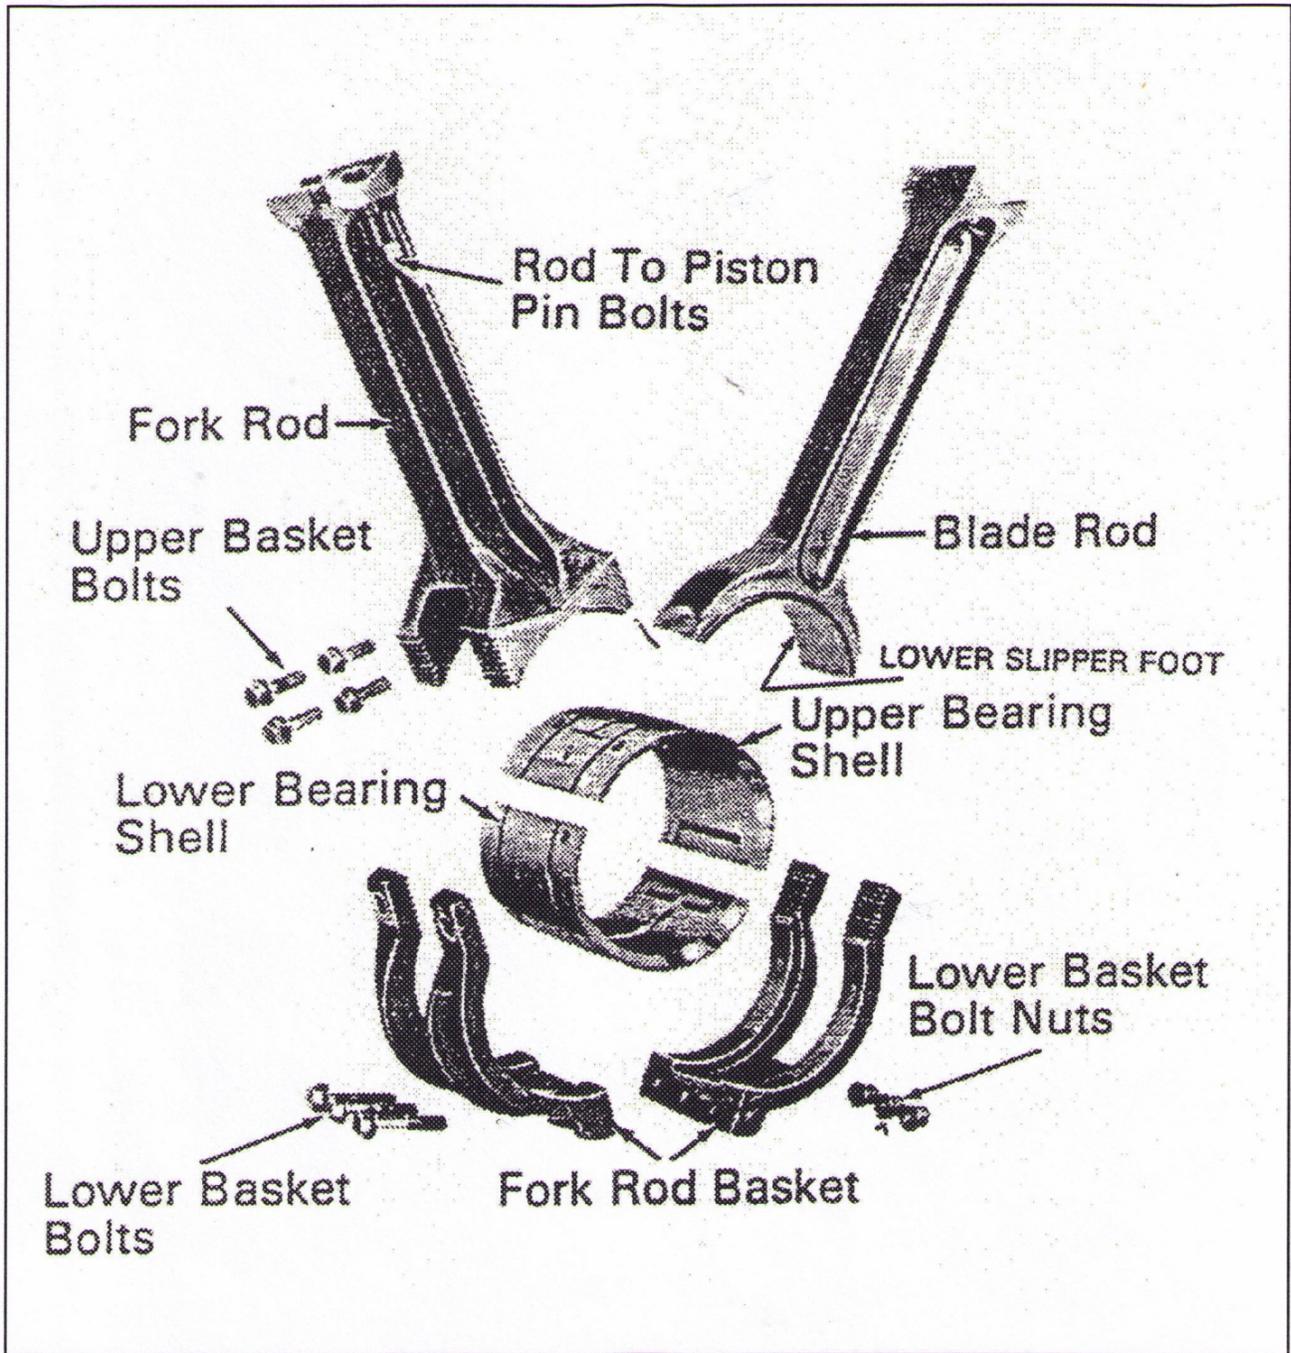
Fork and Blade Connecting Rod Design - EMD
